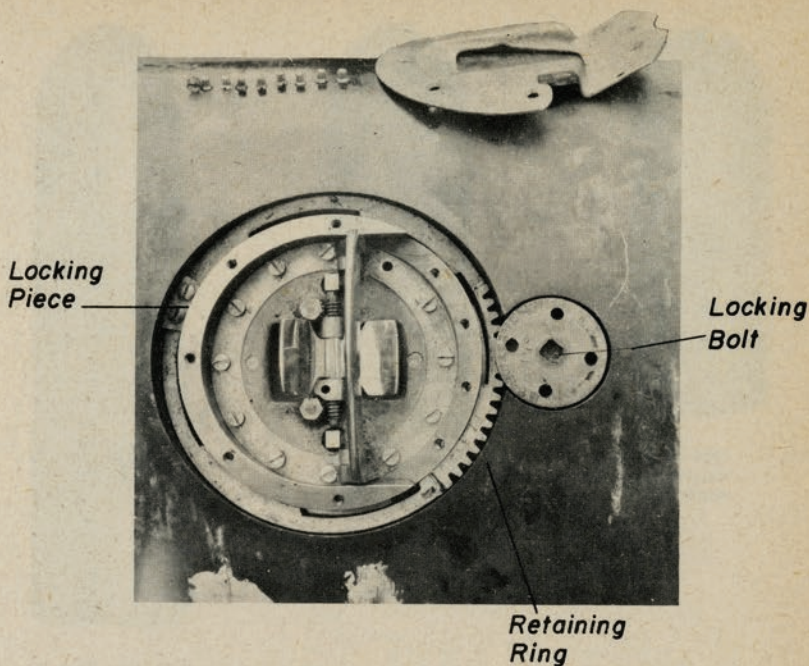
Type 90, Model 2 Exploder with Top Cover Removed
